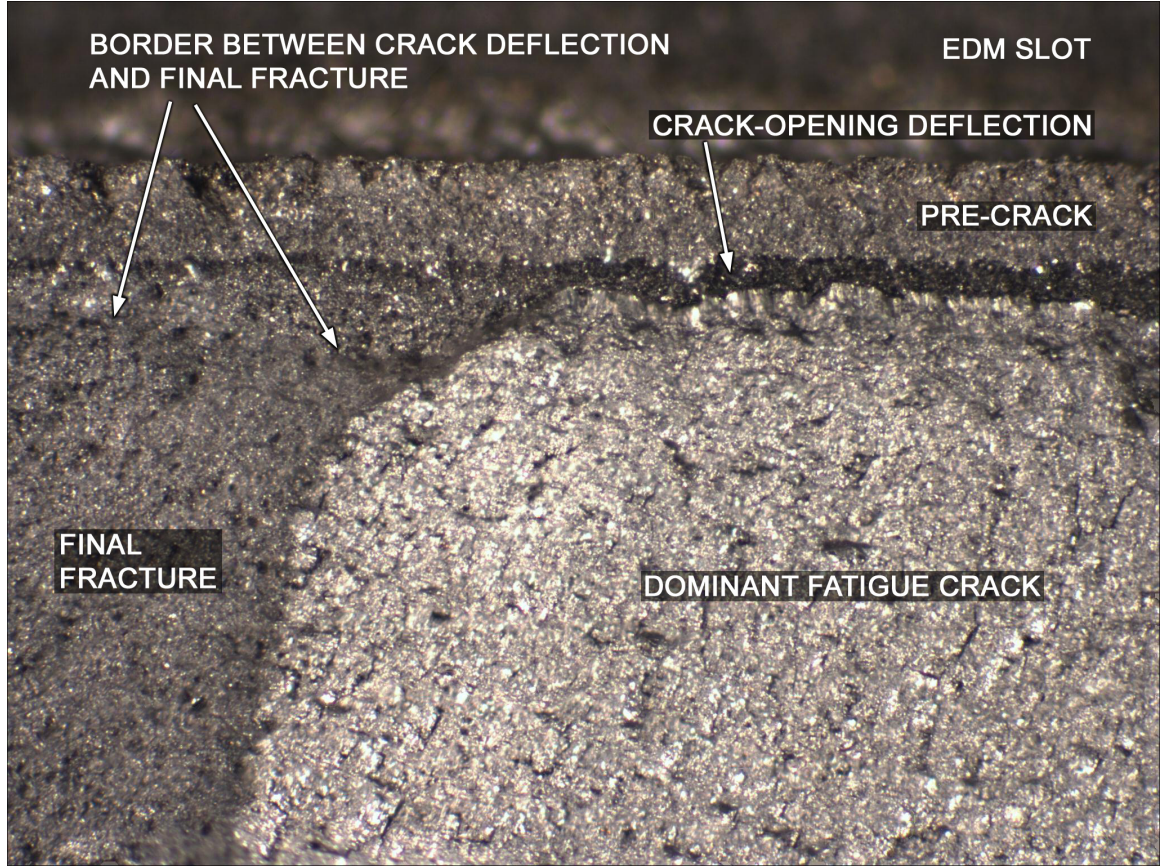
Close-up of right-front quadrant of bottom fracture surface (upper label “C” in Fig. 5.38) showing distinct surface appearance of a crack-opening deflection.
